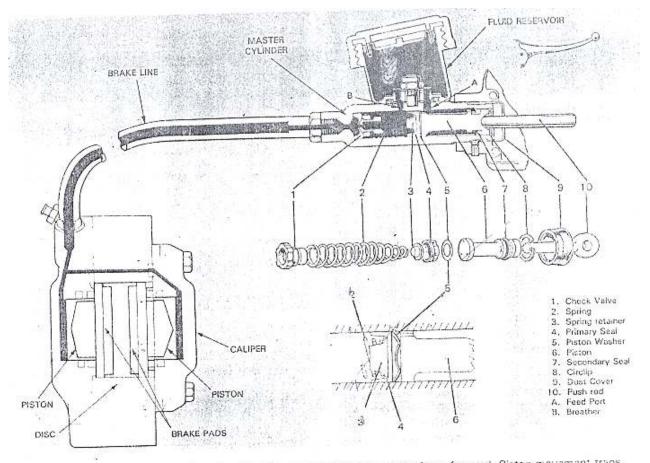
When brake lever is pulled, it causes pushred to move piston forward. Piston movement traps and pressurizes brake fluid in brake line and caliper. Line pressure causes caliper pistons to force brake pads against disc. /(Triumph Metorcycles [Meriden] Ltd.)
